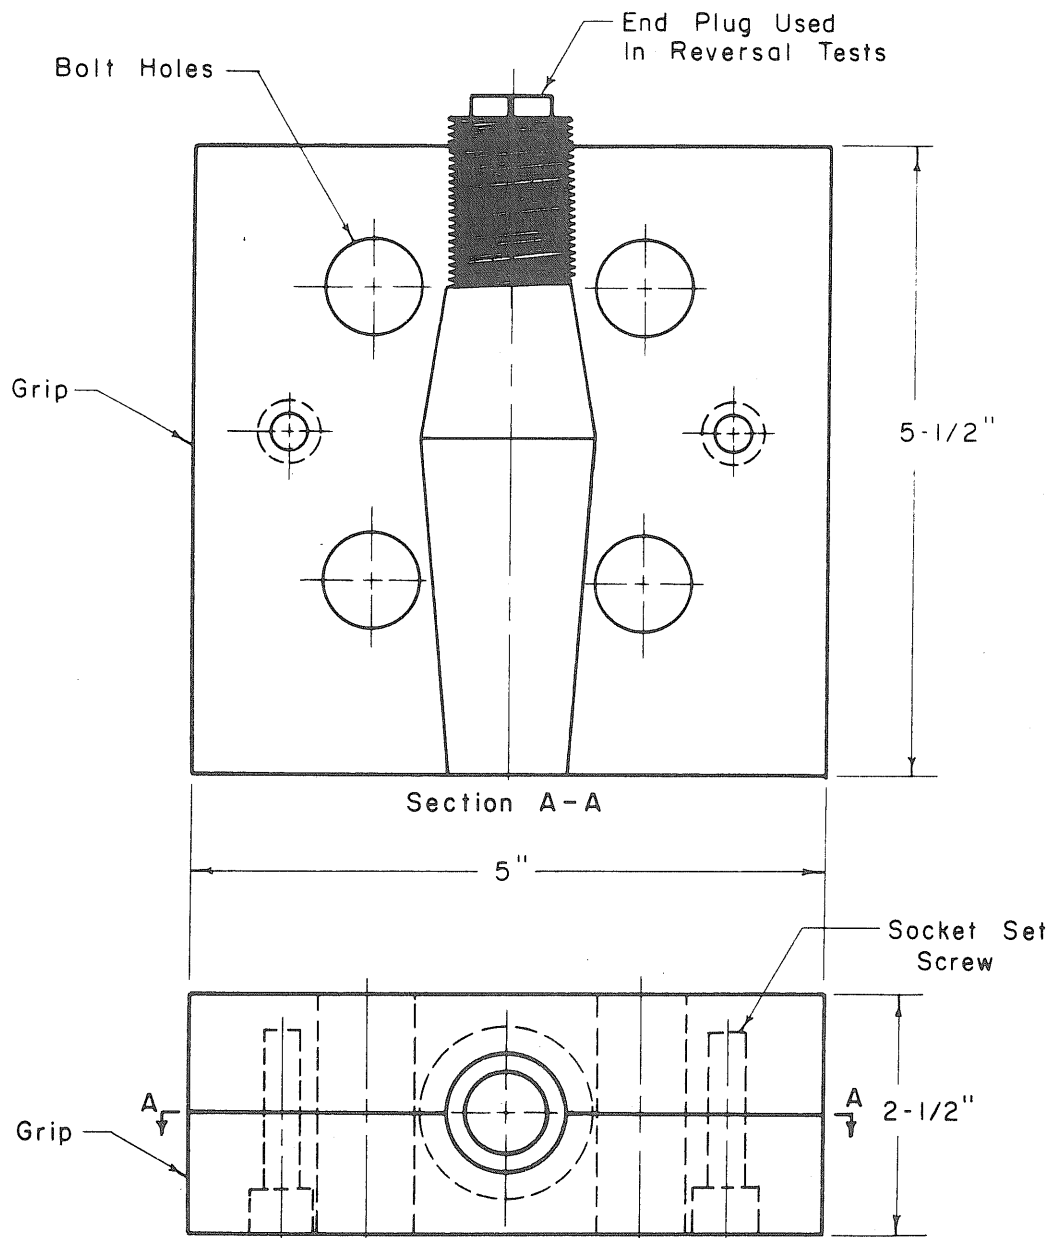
SPECIAL GRIP DEVICE USED IN 50,000 POUND FATIGUE MACHINE
